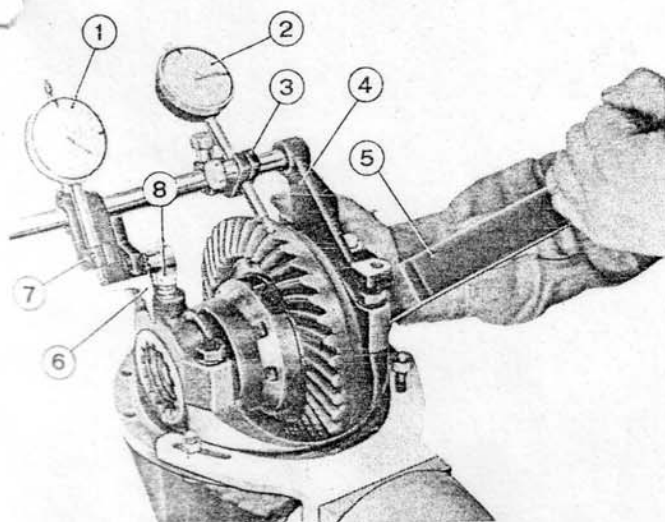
Using fixture A. 95688 to adjust differential cage bearing preload.
